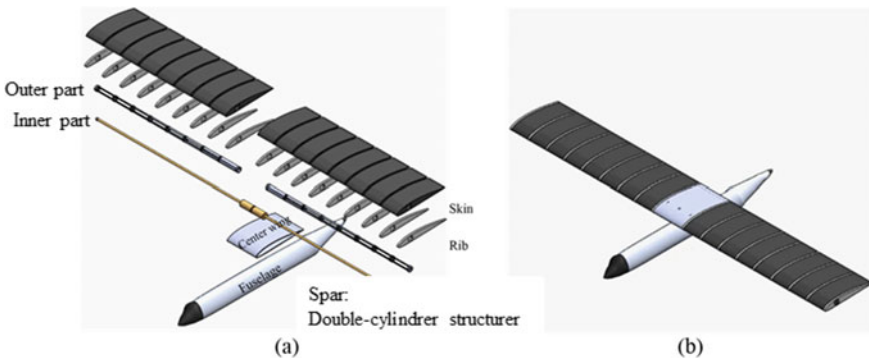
Application of double-cylinder structure to morphing wing. a Exploded view, b Assembly diagram
